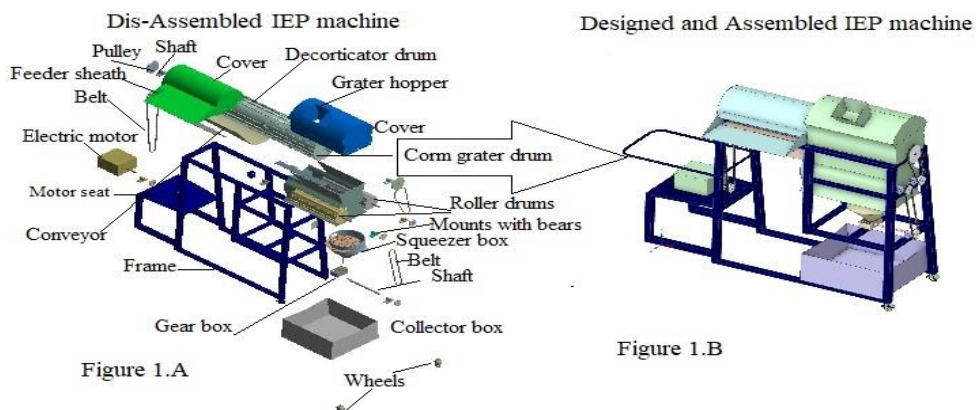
Schematic illustration of the modified IEP machine components (A) disassembled, and (B) assembled
